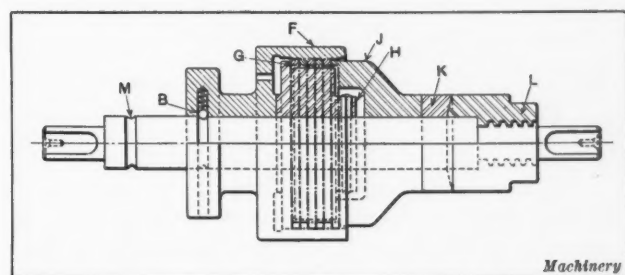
Arrangement for clamping Piston-rings on Arbor preparatory to grinding. This Fixture provides for holding Six Rings at One Time
